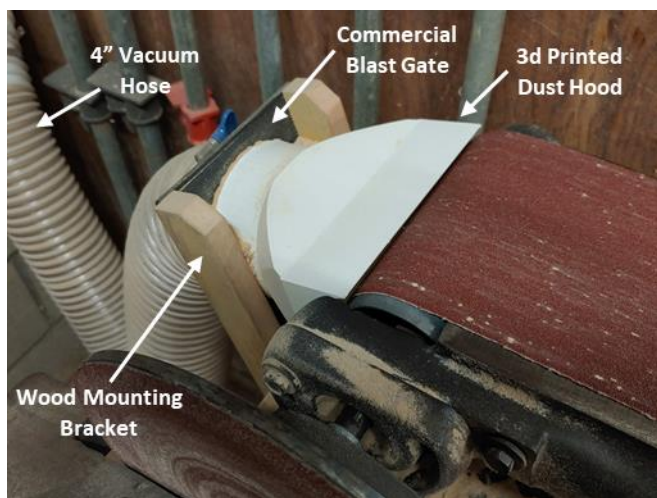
Belt Sander Installation. Here I 3d printed a custom dust hood for my 60-year-old Craftsman belt sander that fits directly on a commercial blast gate. I then used wood rails to mount the blast gate to the sander table.
